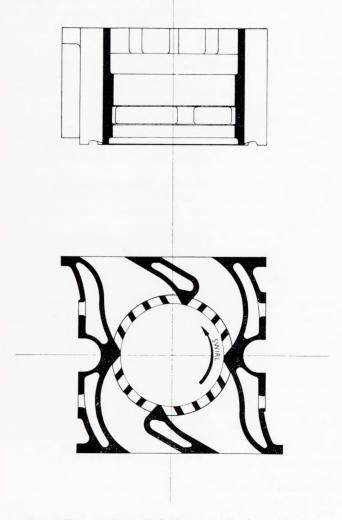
(a)—Exhaust Belt Design in Seahorse Engine
